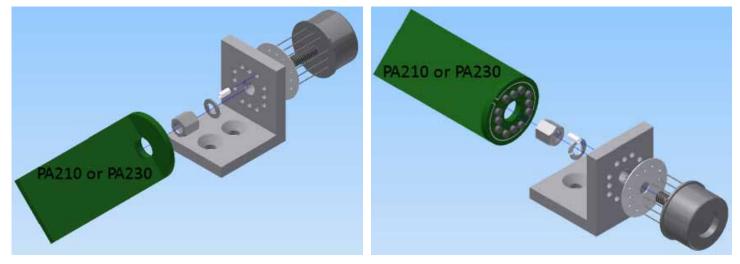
Detector, PA210 or PA230 preamplifier, and heat sink assembly.
